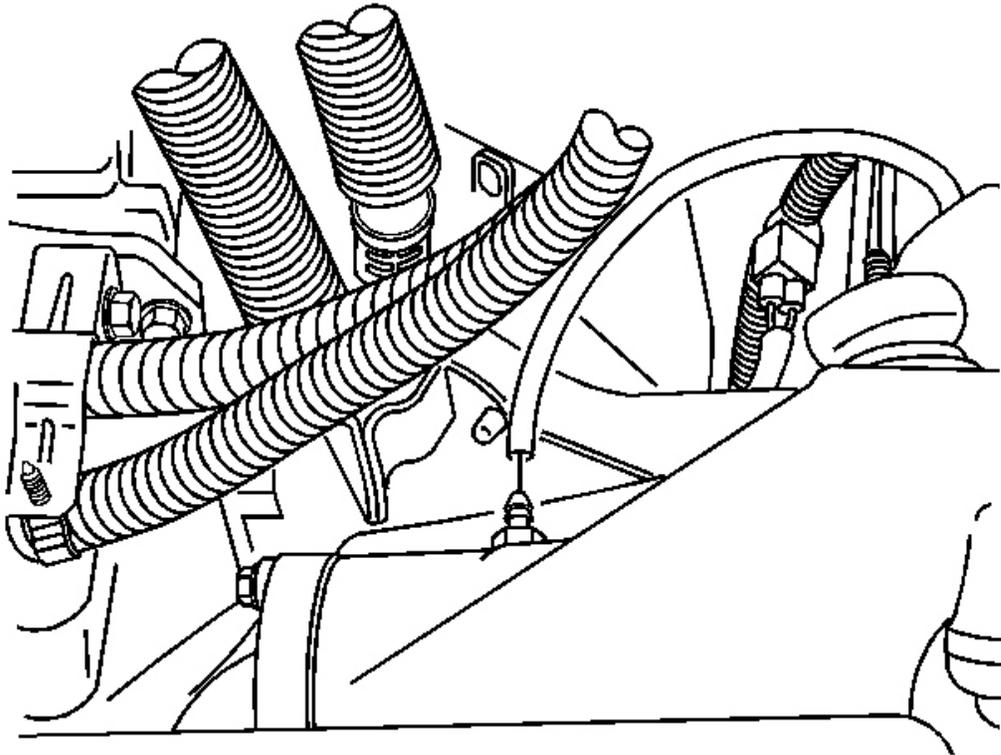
Front Drive Axle Vent Hose & Vent Hose Connector
